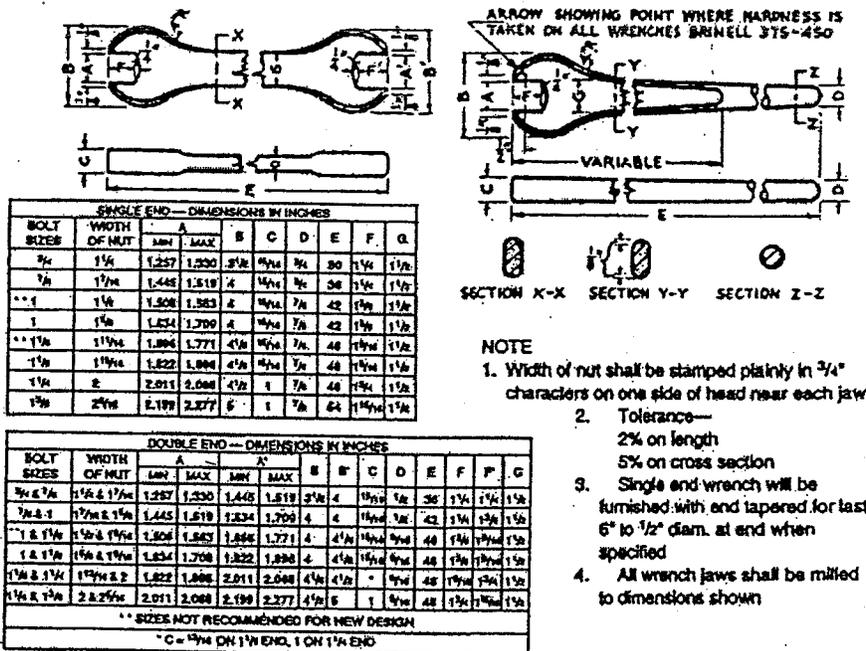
Plan 4-62 - AREMA Track Wrenches for Recommended Track Bolt Nuts
